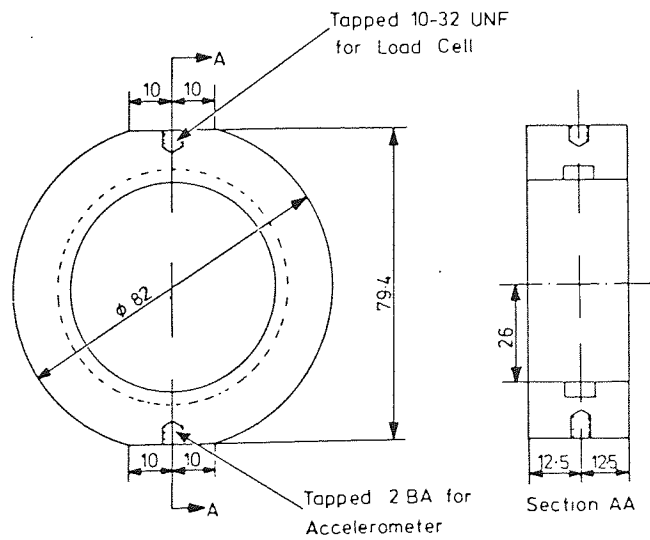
O-Ring Carrier Details- Dimensions in mm
